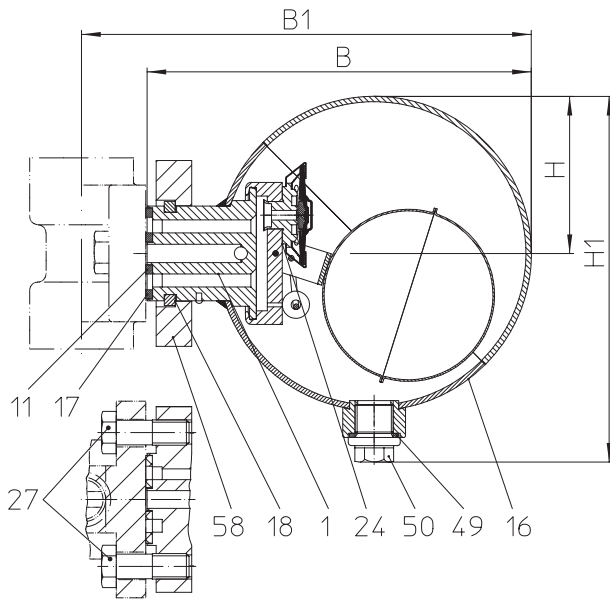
Universal-Flange with 2 x 3/8" UNC-Thread
